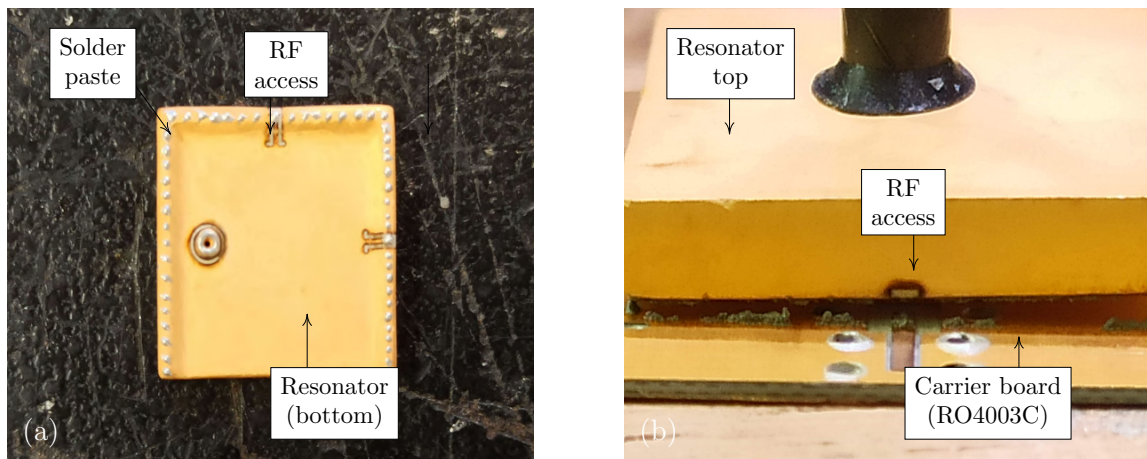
Tunable resonator (Prototype 3) solder paste deposition (a) and device assembly with a pick and place machine (b).
